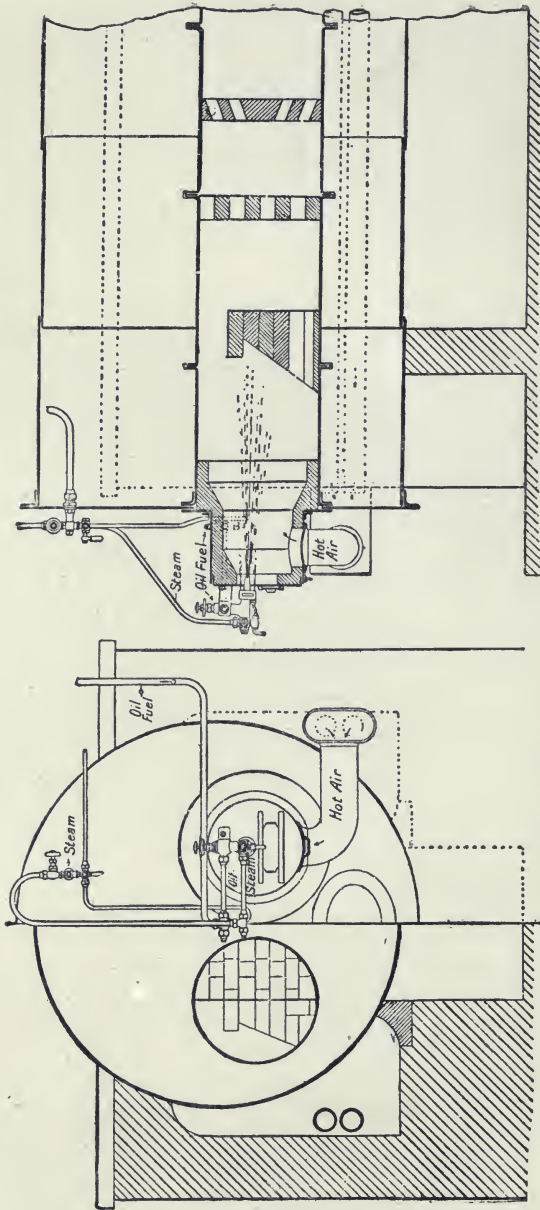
LANCASHIRE BOILER WITHOUT GRATE. FURNACE WITH HOLDEN'S ATOMIZER.
